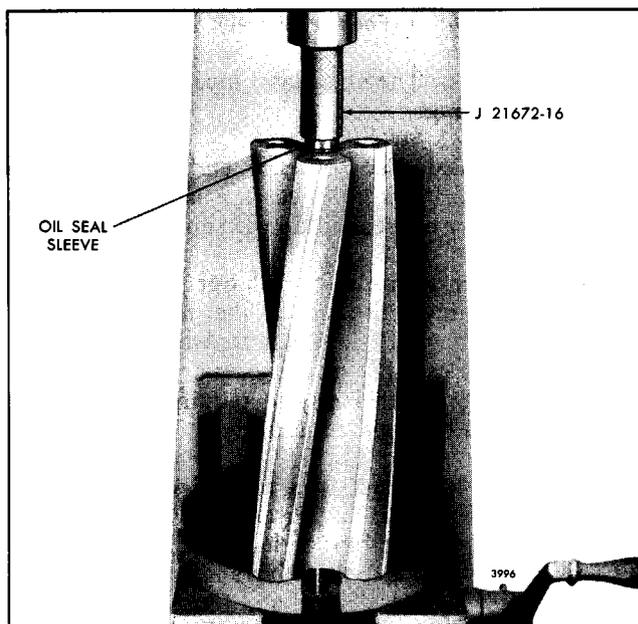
Installing Oil Seal Sleeve on Rotor Shaft (Former Blower)
